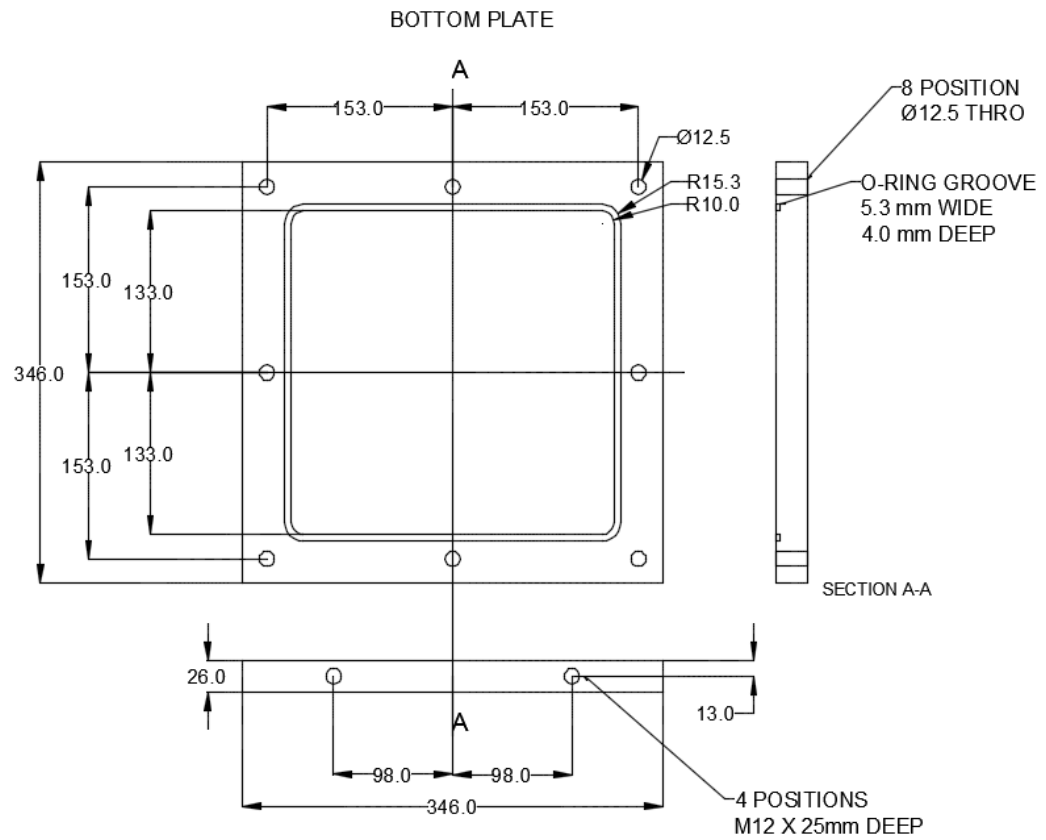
Sketch showing the dimensions of bottom plate of mild steel mould.
